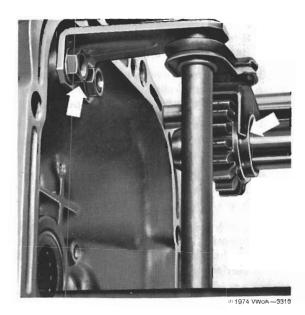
Right-hand bracket adjustment. Slide the bracket on its elongated bolt holes, as indicated by the left arrow, to obtain a slight running clearance between the shift fork and reverse sliding gear (right arrow).
